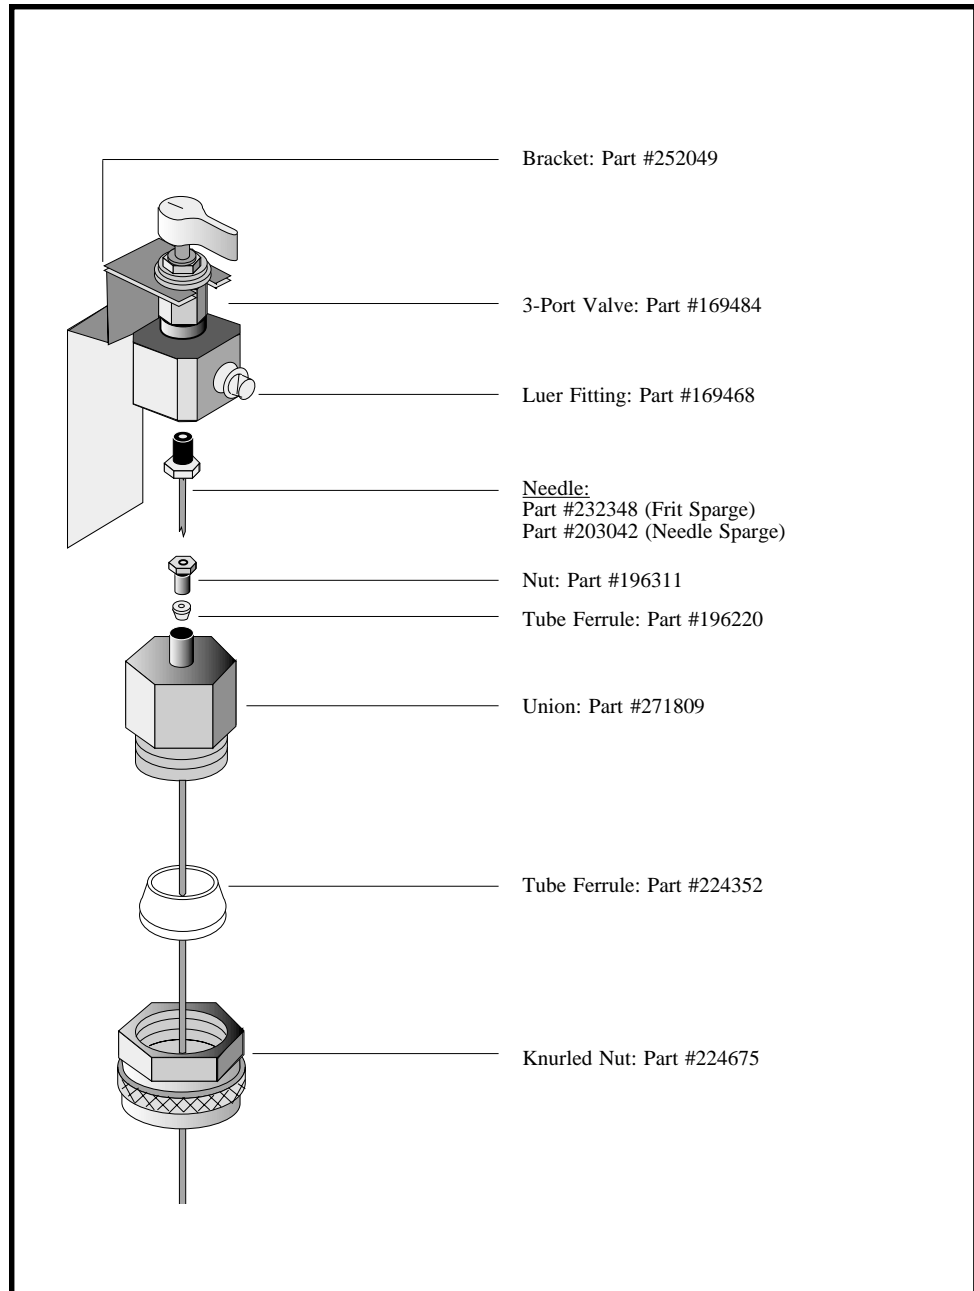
Sample Valve and Sparge Mount Assemblies
